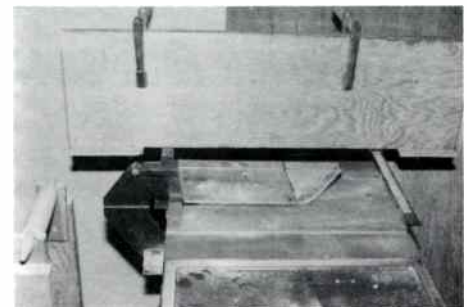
Table saw setup for cutting large pieces of plywood or particle board.
